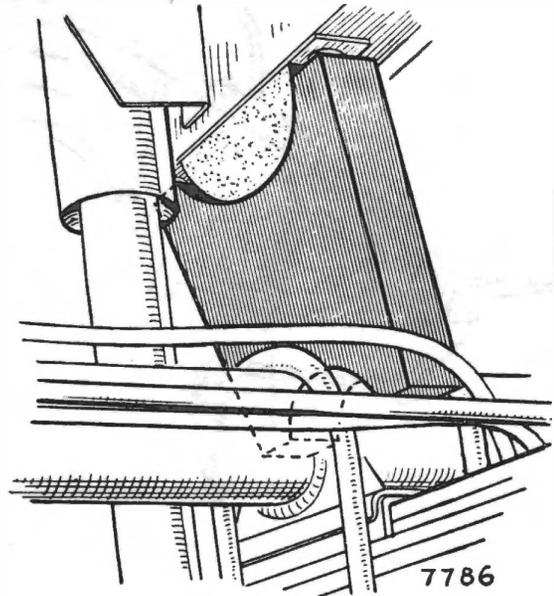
Rear gap gauge in position, ensure that the rear bottom corner is clear of the hydraulic pressure pipes
